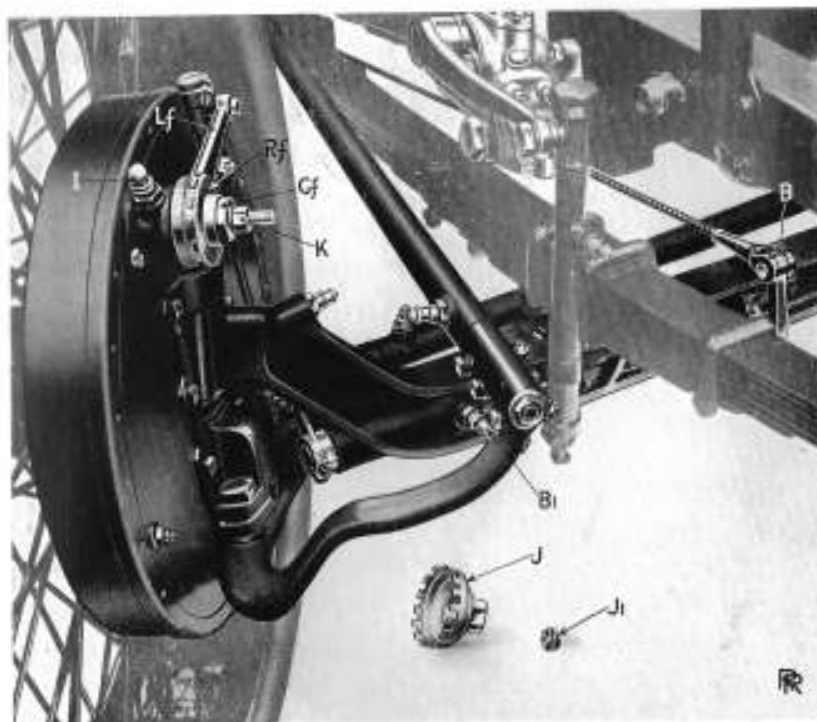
FRONT WHEEL BRAKE ADJUSTMENT.
